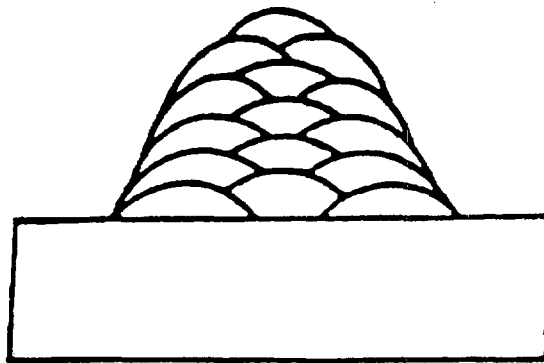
Chemical analysis weld pad schematic.
